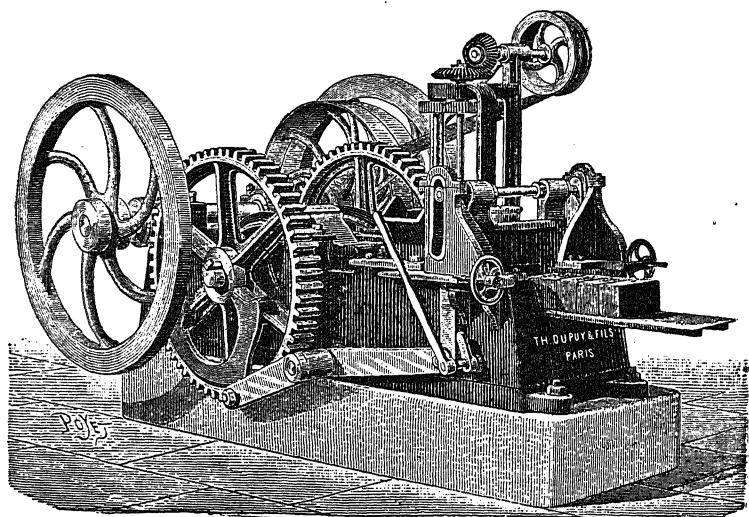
Machine for making wood charcoal briquettes or coal blocks with horizontal piston.
